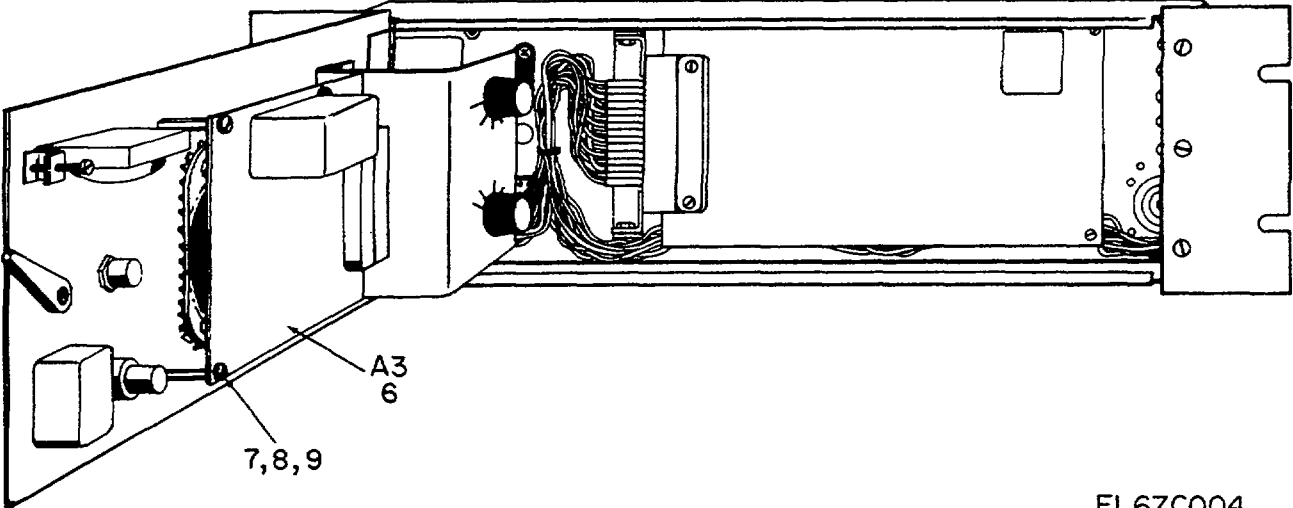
Front Panel Assembly (Sheet 1 of 2).
